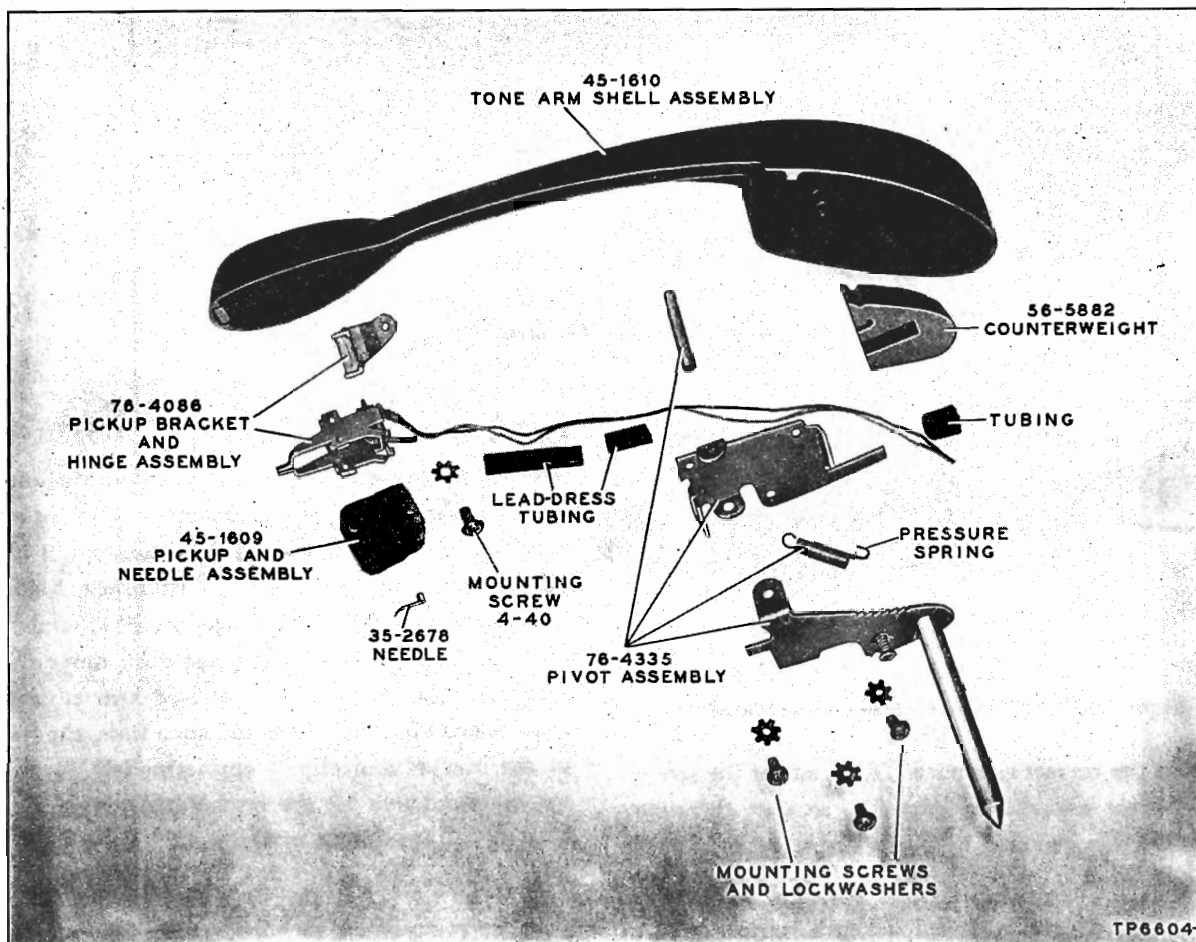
Record-Player Tone-Arm Assembly, Part No. 35-2686
